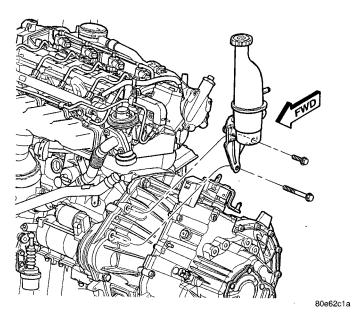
Power Steering Fluid Reservoir Mounting INSTALLATION
